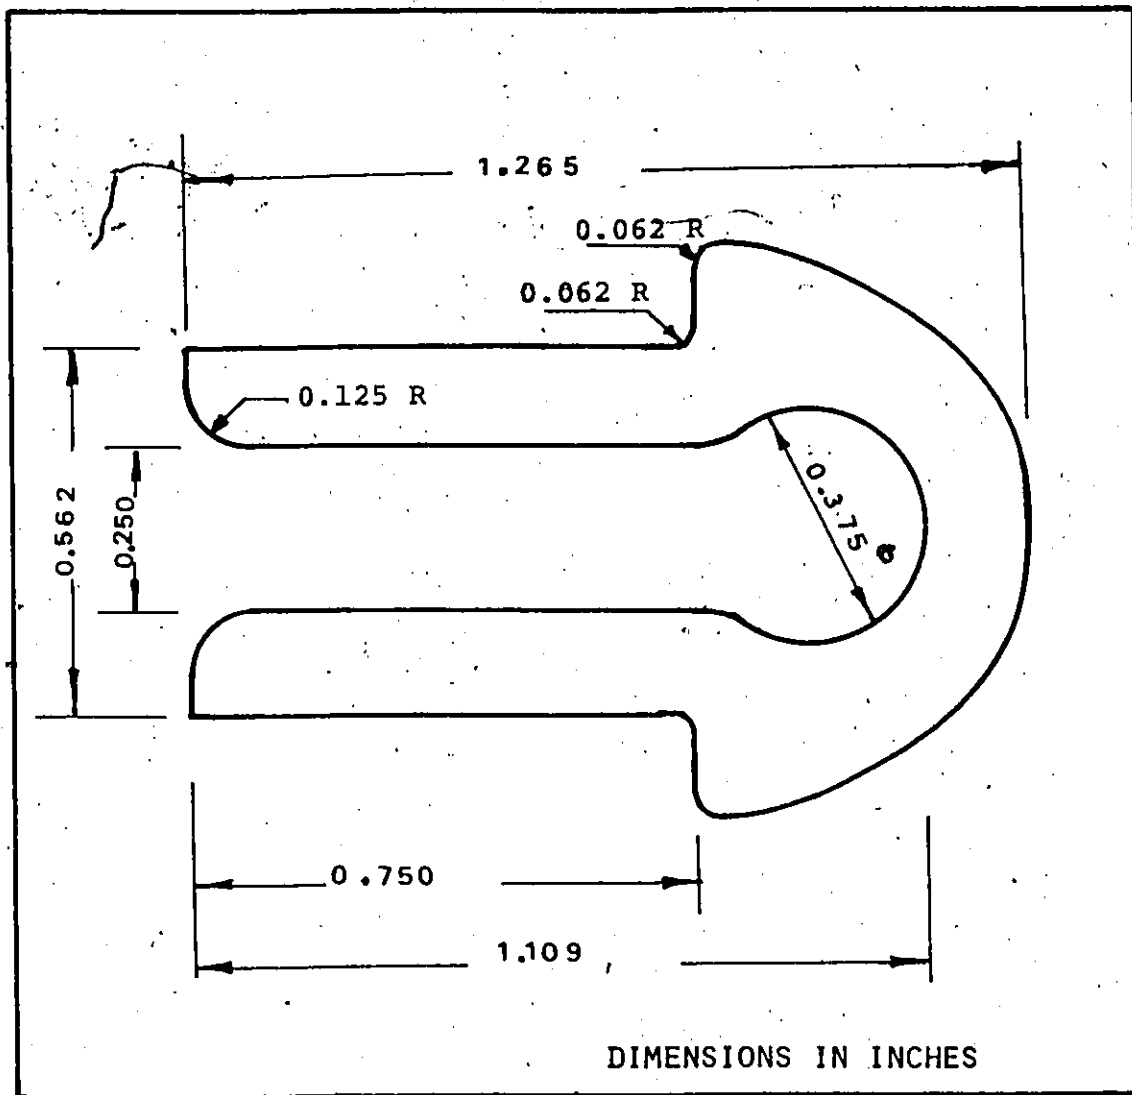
DIMENSIONS OF OPTIMIZED MALE EXTRUSION
